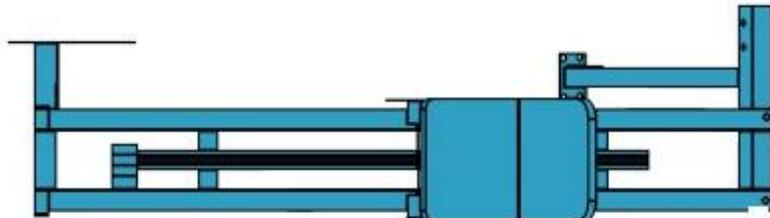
Inclined rail and actuator (black element), underneath rail assembly (top view). Note: angle of inclination removed.
